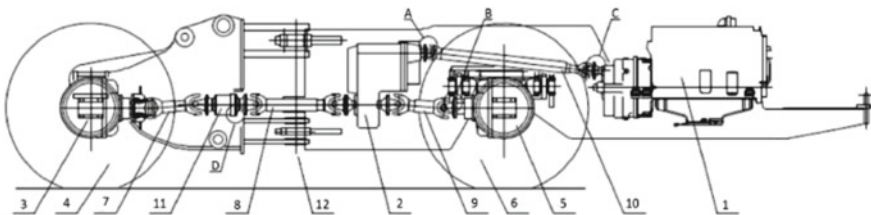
Design of the underground mining vehicle: 1—diesel engine with hydraulic TC; 2—gearbox; 3, 4—front axle with a limited-slip differential, brakes and wheels; 5, 6—rear axle with brakes and wheels; 7, 8, 9, 10—Cardan shafts; 11—intermediate support; 12—articulation joints; A, B, C, D—couplings with potential angular clearances
